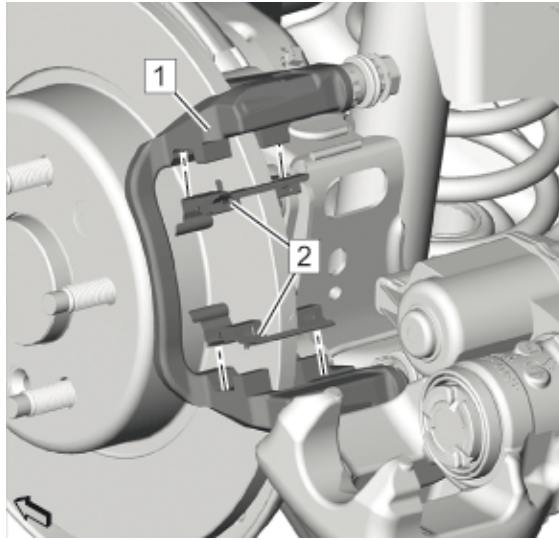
Rear Brake Caliper Bracket And Brake Pad Springs
